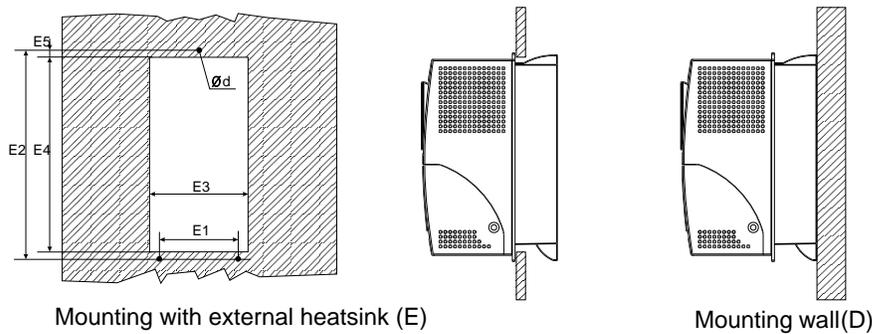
Drive dimensions (sizes 3/4 HP to 20 HP)
